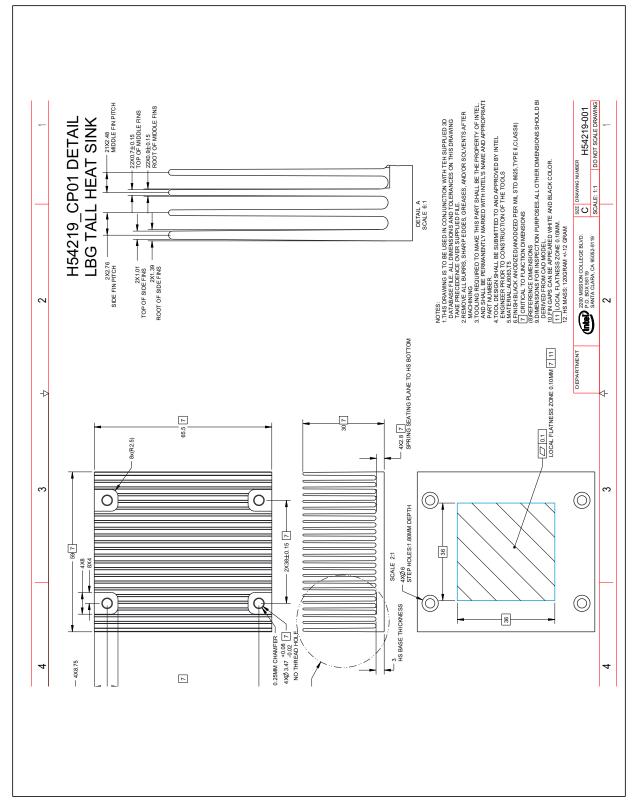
H54219 - Reference Heatsink Assembly Drawing - Sheet 2 of 2
